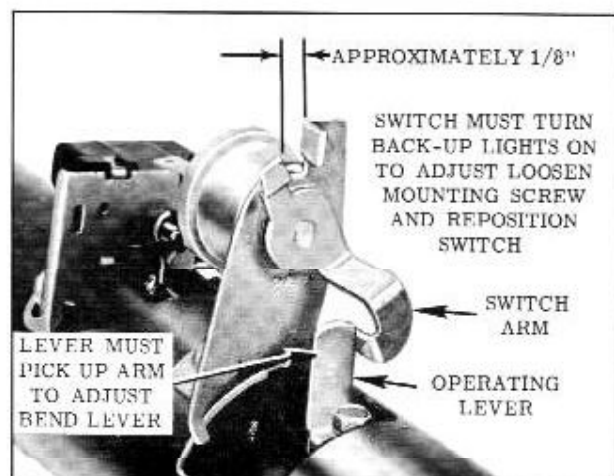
Back Up Lamp Switch (Rev. Pos)
